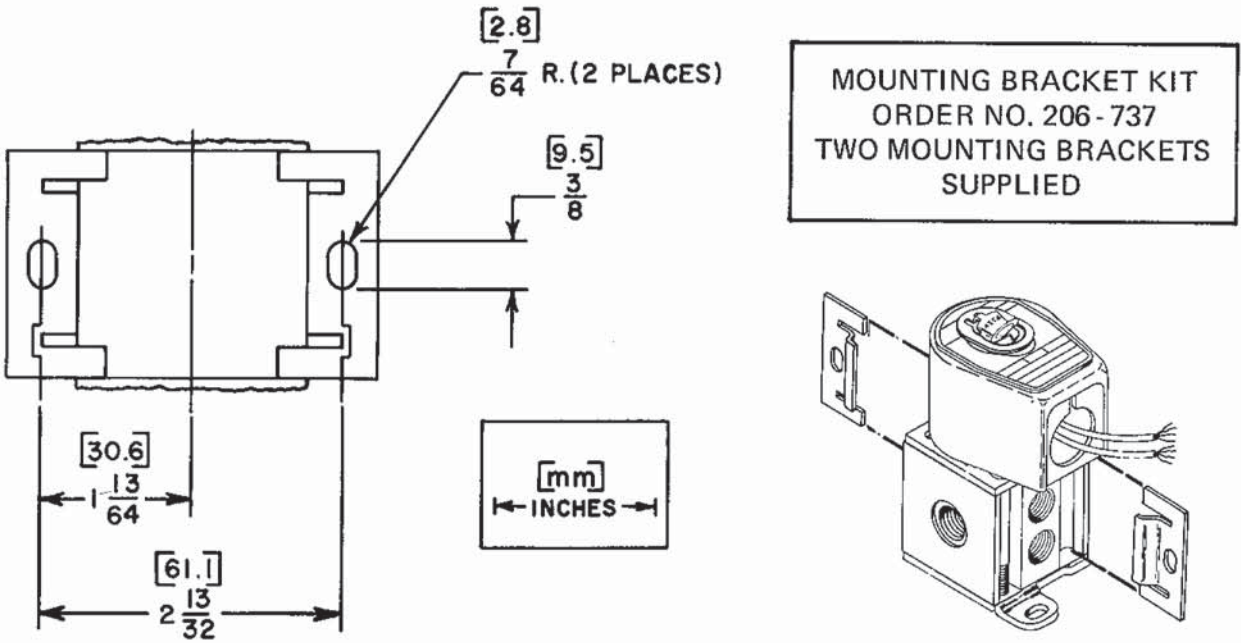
Mounting Brackets (Optional) — Mounting Dimensions Single Valve — Flush Mounting
